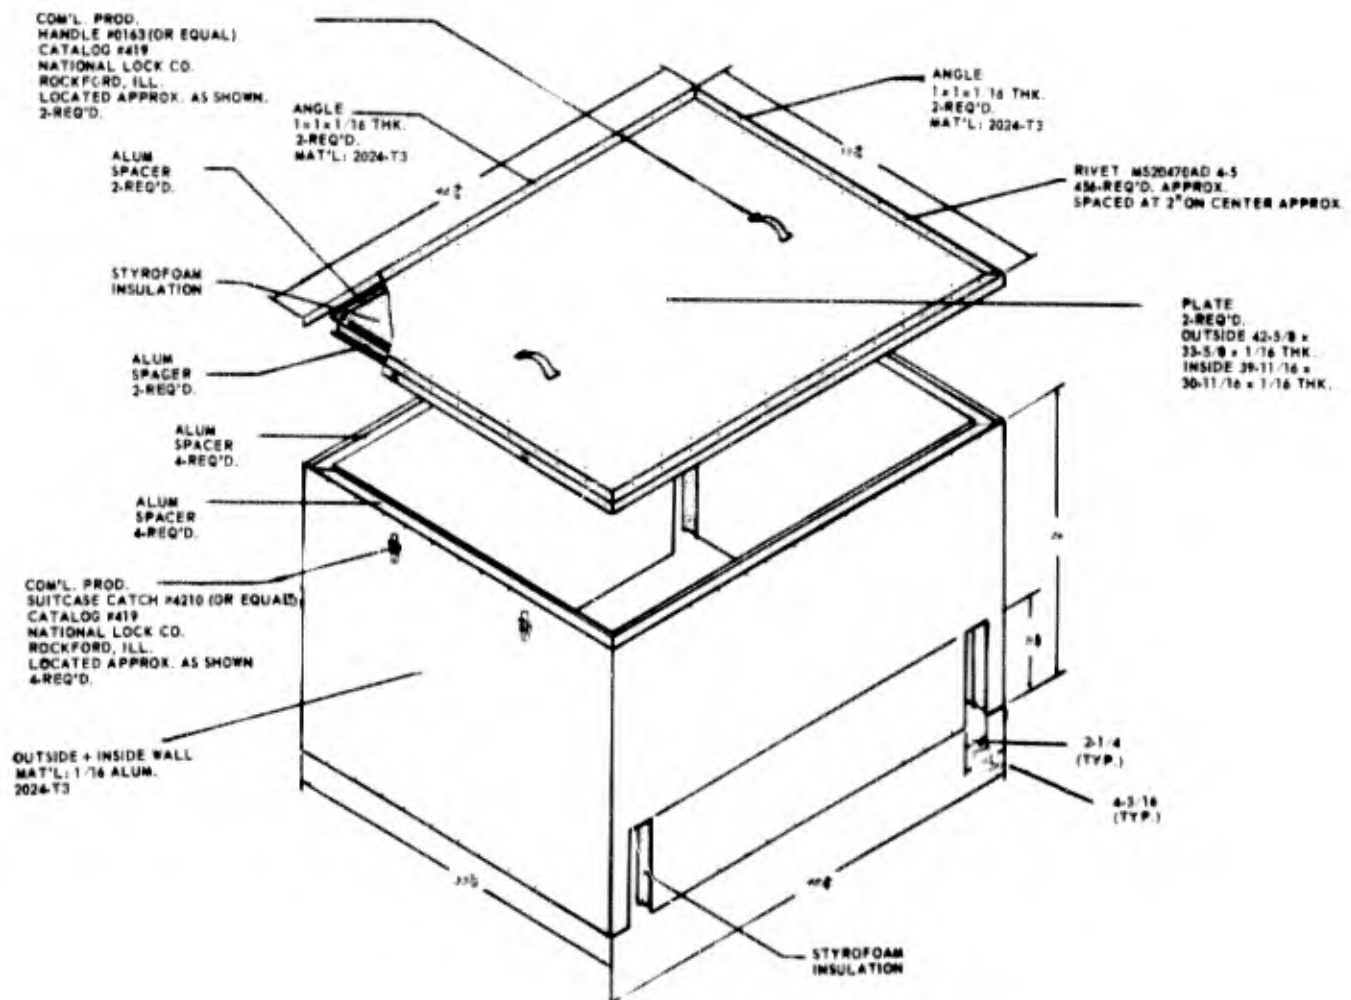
CAMERA CHAMBER CONSTRUCTION
